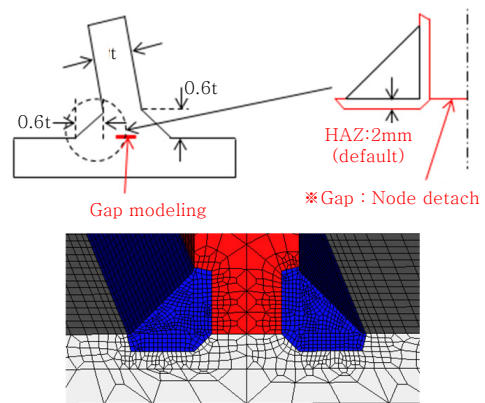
Geometry variables of the fillet-bead weldment
